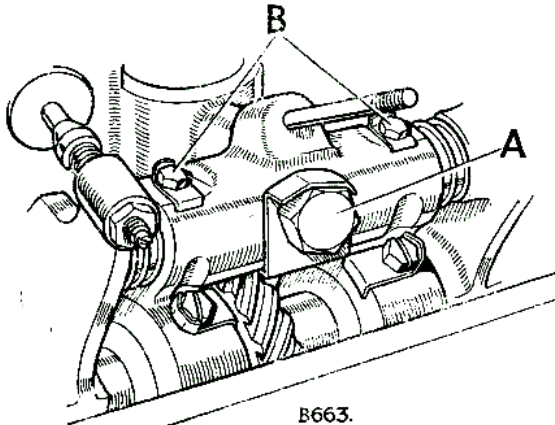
Exhaust rocker shaft and distributor housing location bolts
